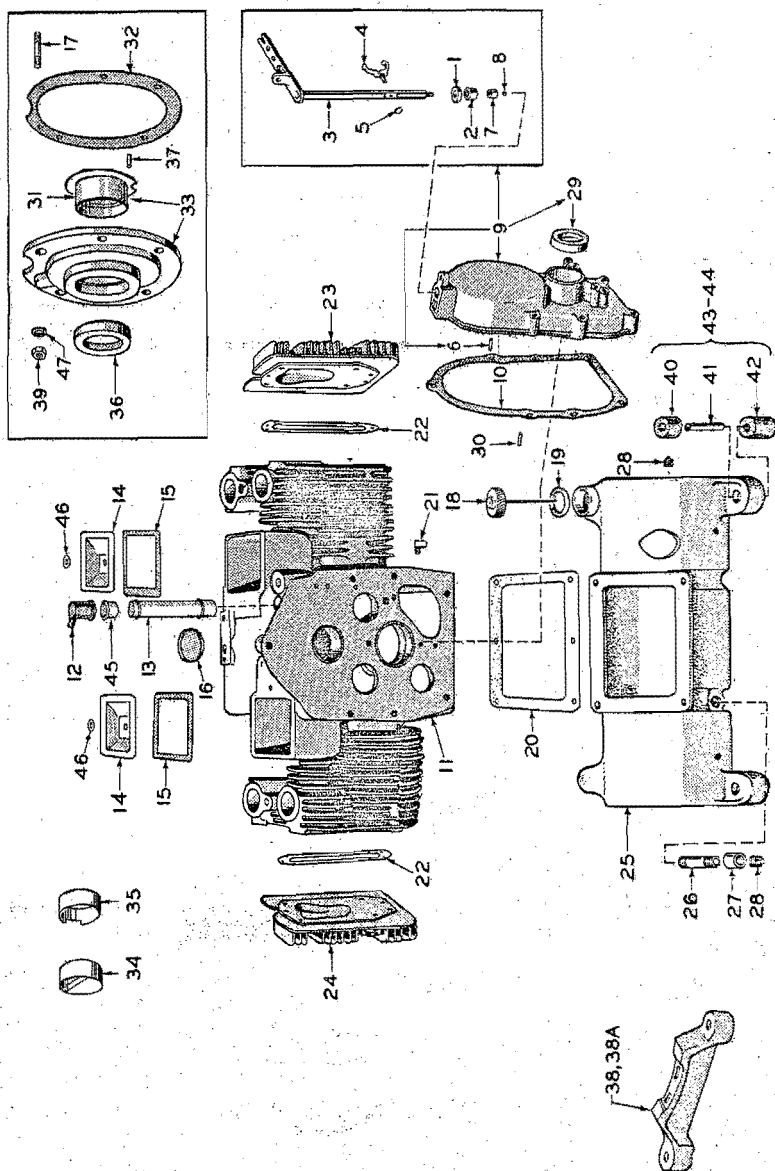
FIG. A - CYLINDER BLOCK, OIL BASE AND GEAR COVER GROUP
